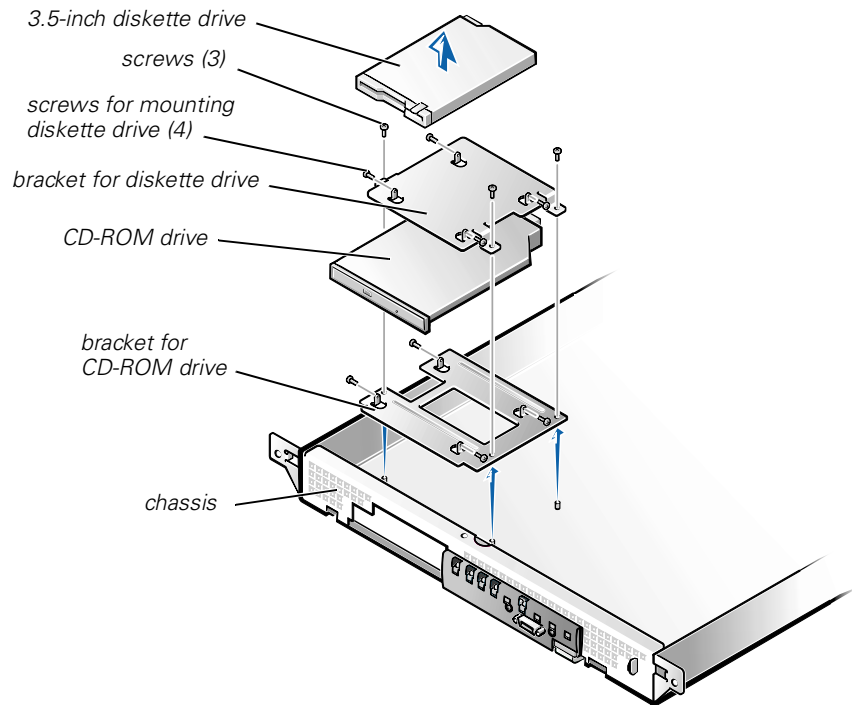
Diskette Drive and CD-ROM Drive Removal
